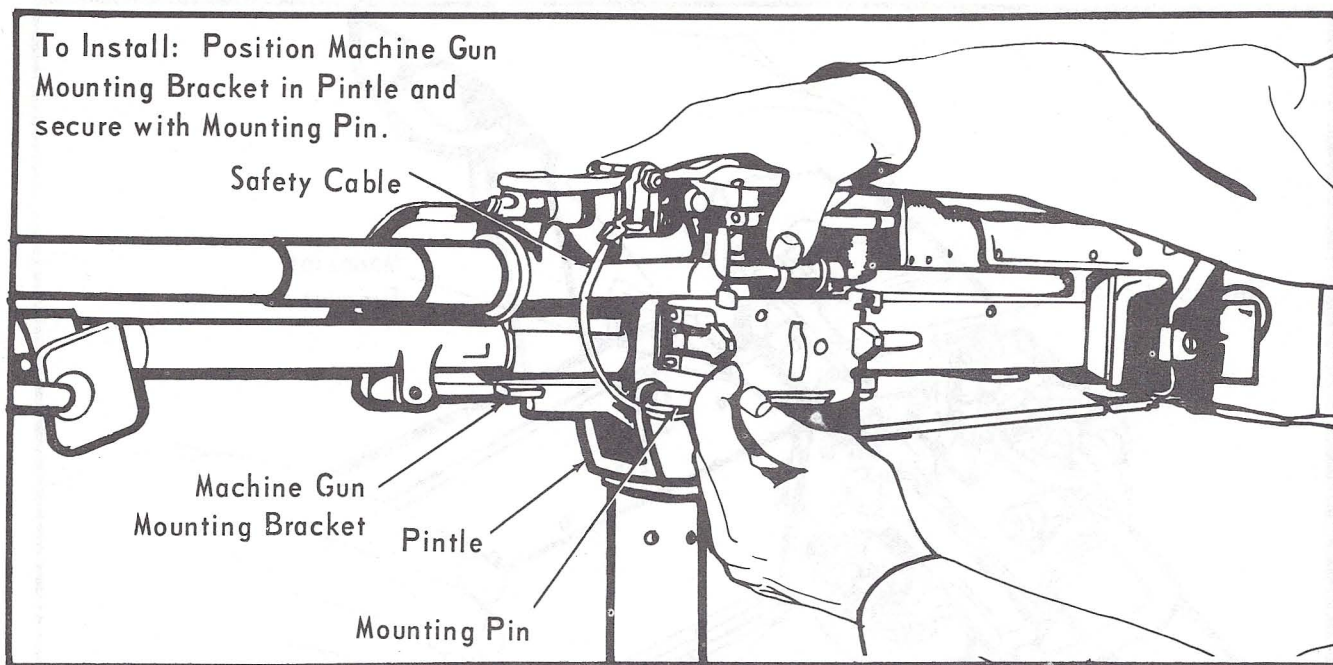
Machine Gun Positioned on Pintle—Left Side Shown
